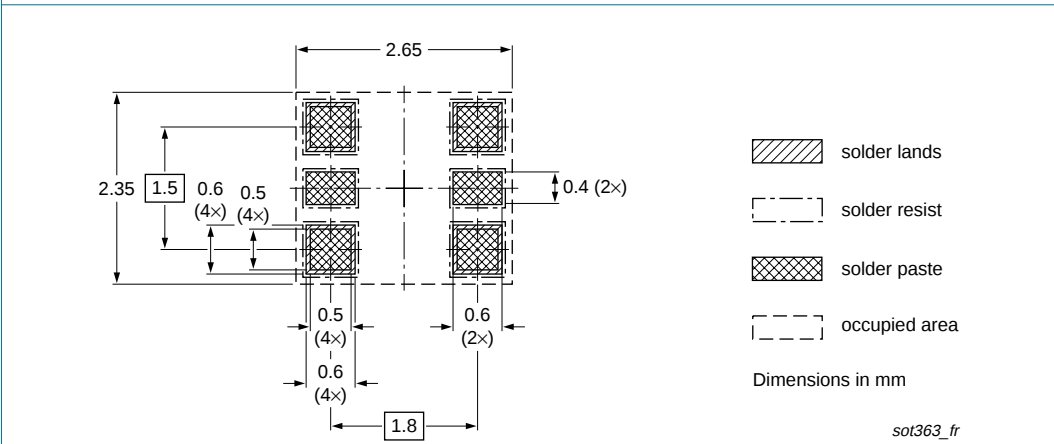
Reflow soldering footprint SOT363 (SC-88)
